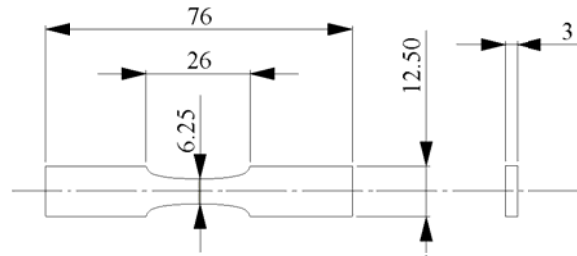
Butt-brazed joint tensile specimen (dimensions in mm)
